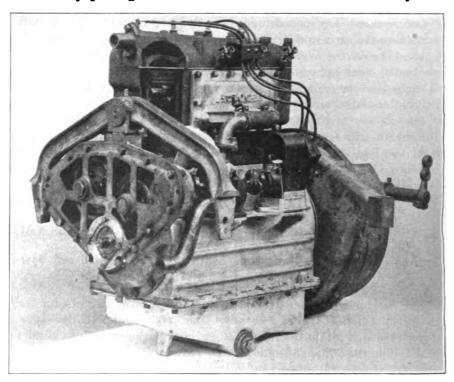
FOUR-CYLINDER GASOLINE AUTOMOBILE ENGINE, 1921.
